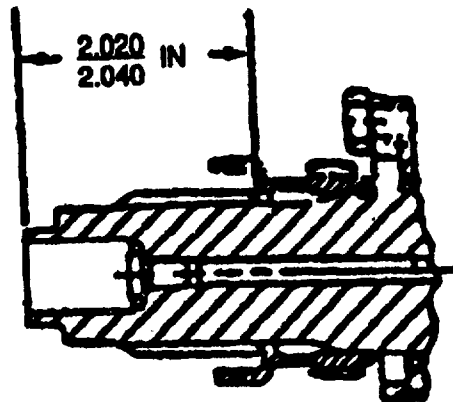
Measurement from Forward Face of Power Shaft to Forward Face of Gear (T53-L-701, -701A).
